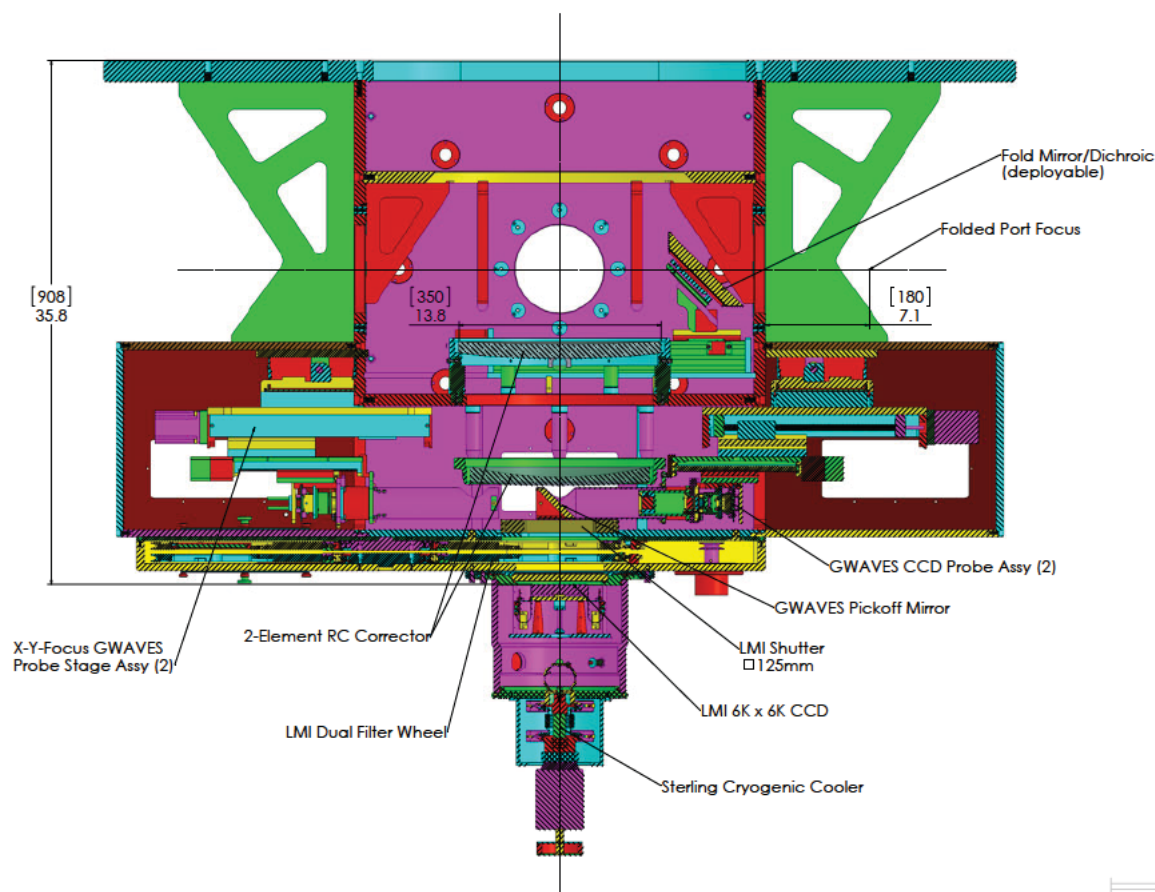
Cross sectional model view of the RC instrument cube assembly, including the RC corrector lenses, GWAVES probe assemblies, and the LMI filter wheel and camera assemblies.
